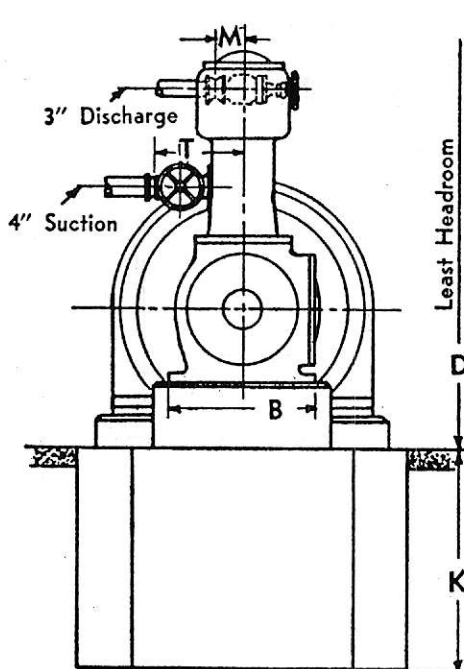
Dimensions, Belt Driven Compressor - 11-1/2" x 10"
